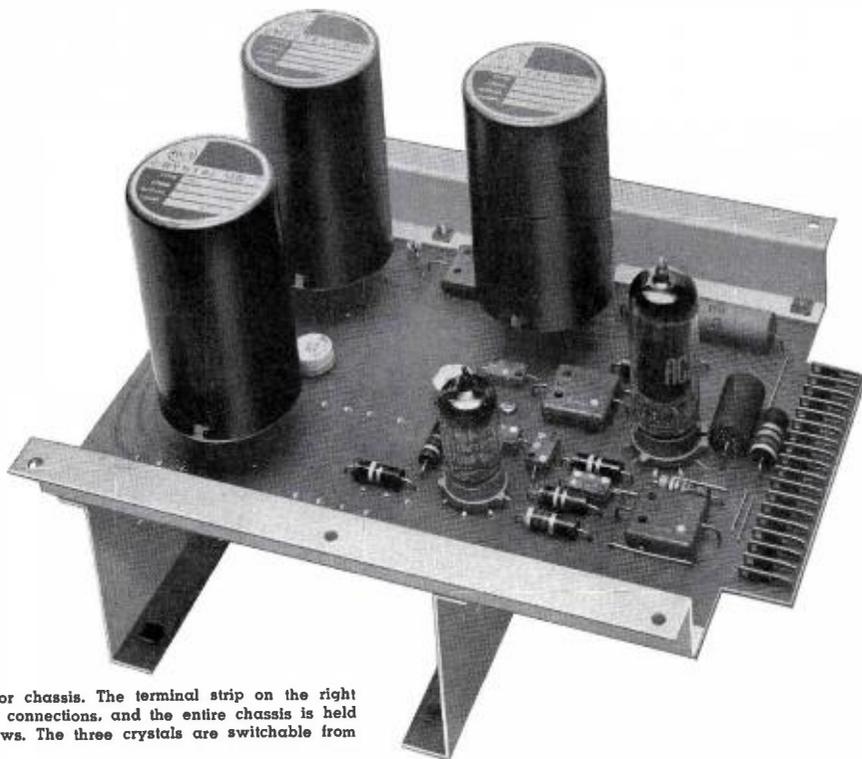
This is the oscillator chassis. The terminal strip on the right contains all of the oscillator connections, and the entire chassis is held in place with six thumbscrews. The three crystals are switchable from a front panel control.
